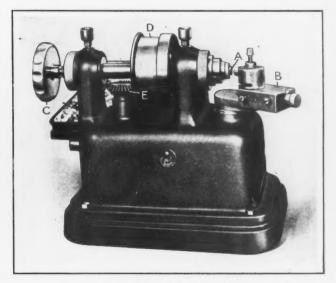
Machine employed in rounding the Ball Bace of the Type-bar Hanger illustrated in Fig. 3
